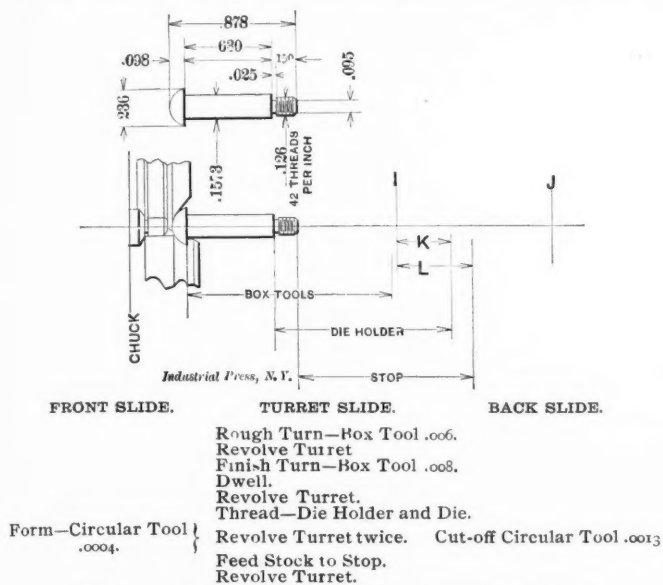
Screw made on Turret Lathe and Operation of Slides.
